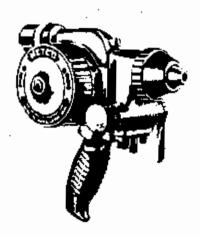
A TYPICAL WIRE-SPRAY METALLIZING GUN
